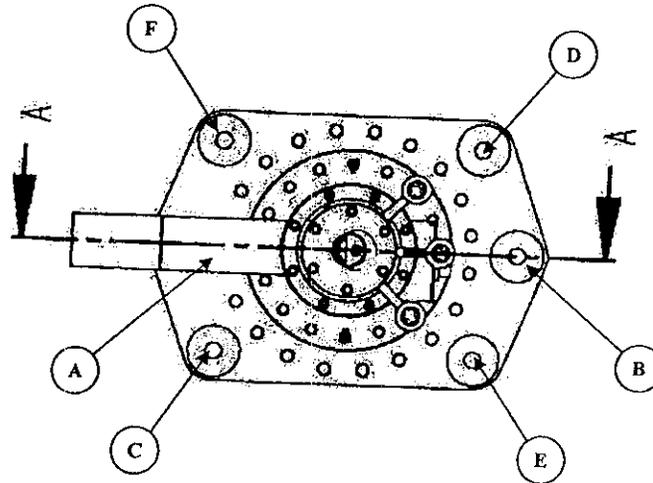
The specified sequence for tightening the Belleville washer assemblies.
